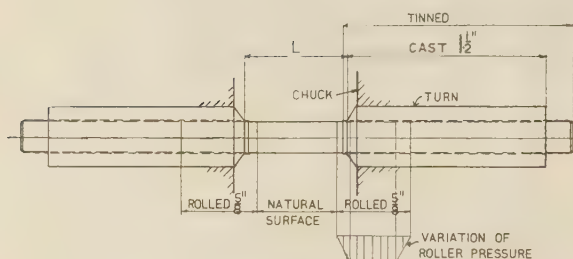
DIMENSIONS OF THE ROLLED SECTIONS OF THE TORSION FATIGUE SPECIMENS
